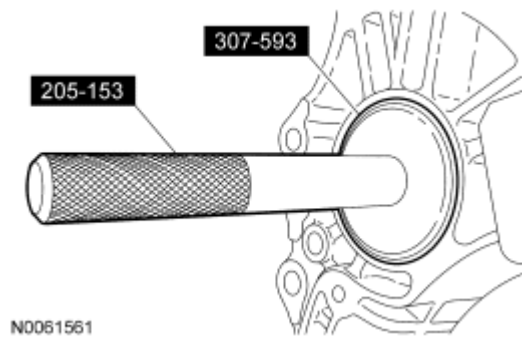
Identifying Differential Fluid Seal & Special Tools (307-593, 205-153)
